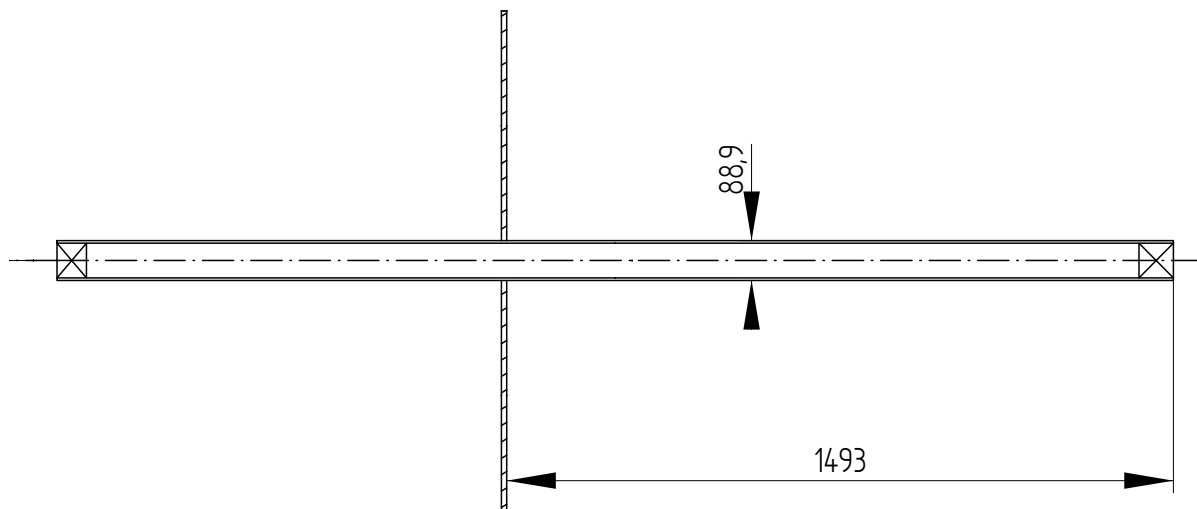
Section view of the support shaft with the welded flange.
